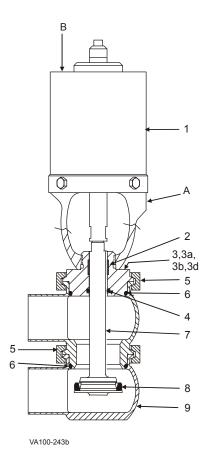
W63/W83 Shut Off Valve (Air-to-Raise Shown)
